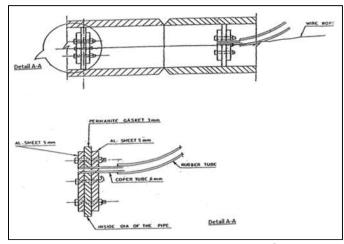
ALUMINIUM DAM ARRANGEMENT
